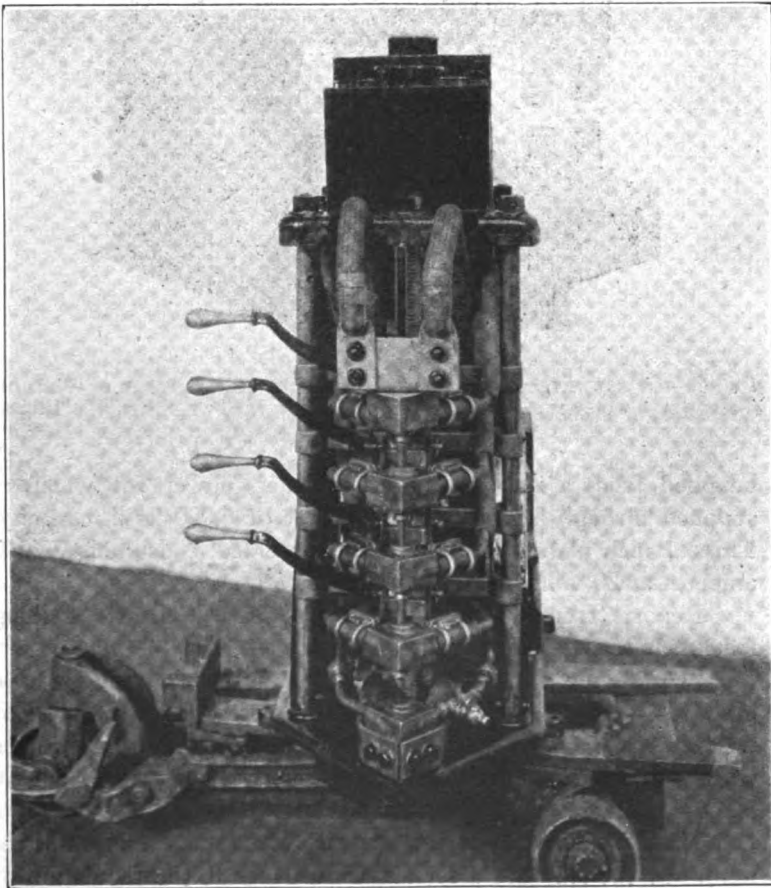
ELECTRIC RIVET HEATER—FRONT VIEW
